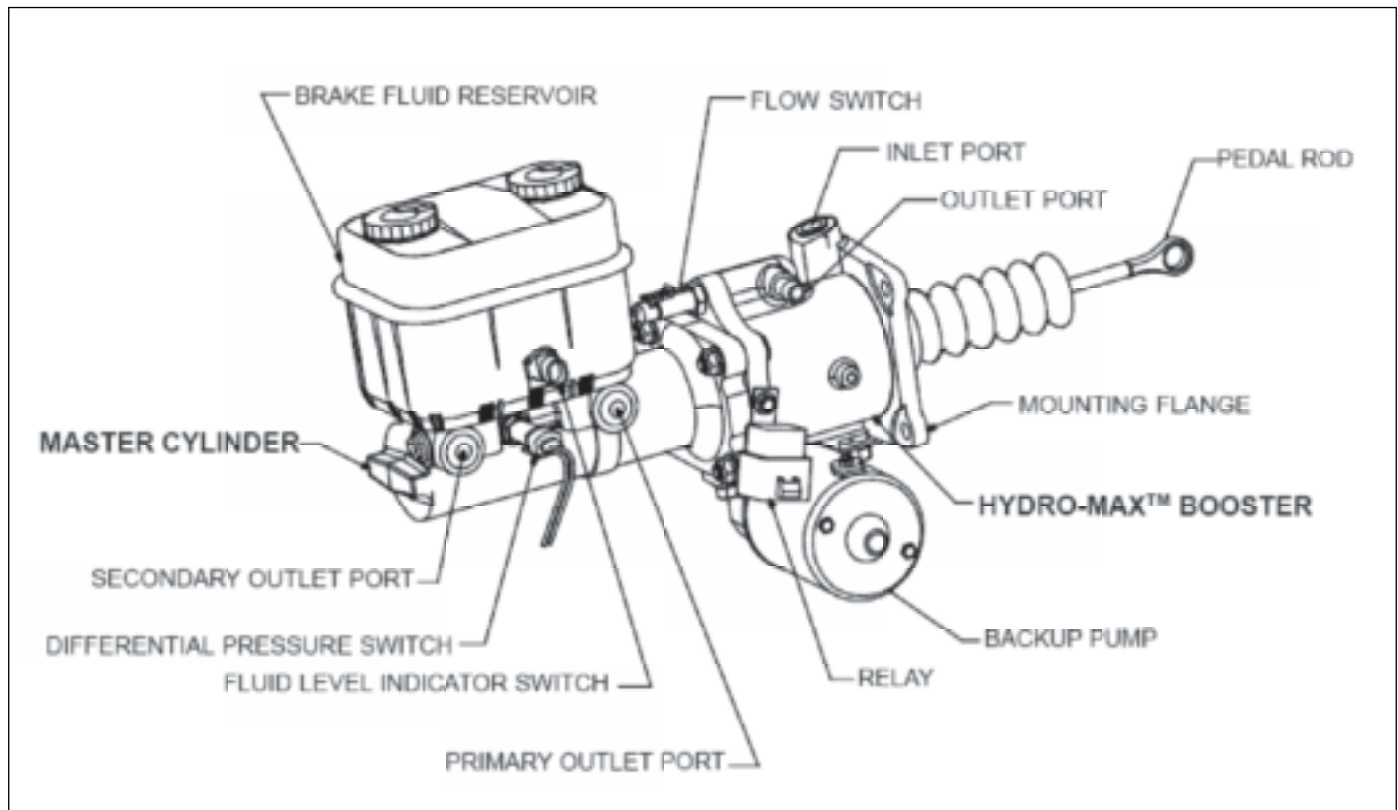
Hydro-Max booster and master cylinder assembly.
